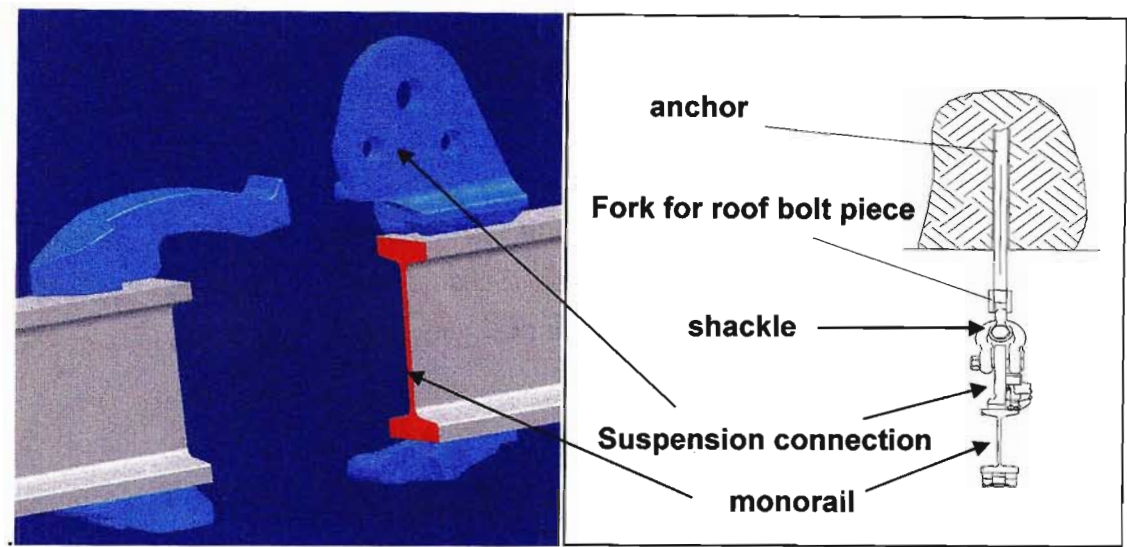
I-beam rail suspension (Nehrling, 2002)
